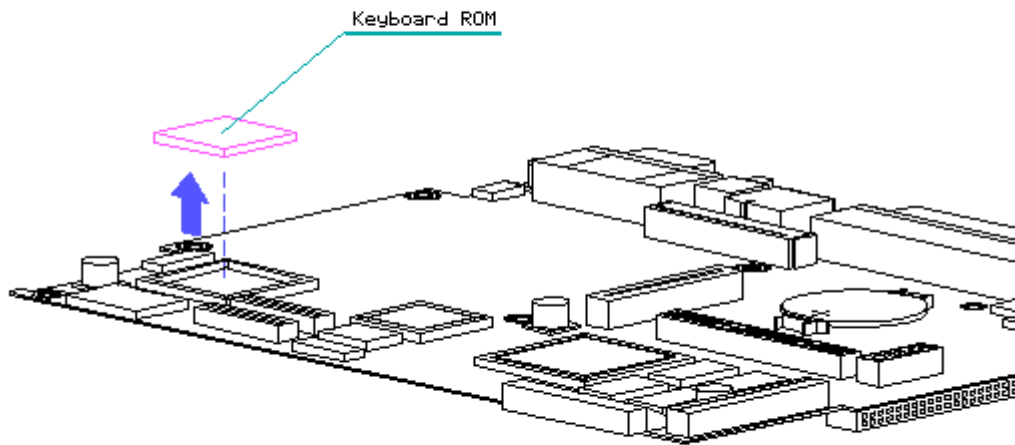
Removing the Keyboard ROM from the Processor Board
